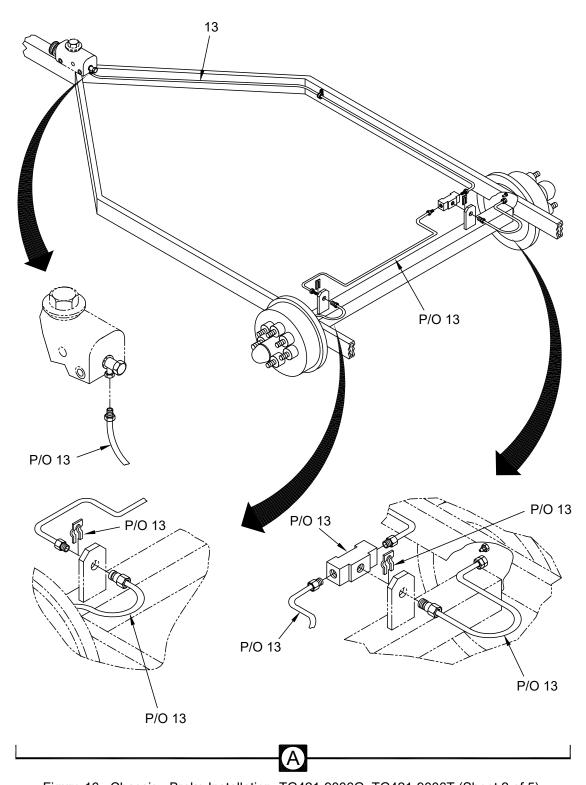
Chassis - Brake Installation, TG421-9006G, TG421-9006T (Sheet 2 of 5).
